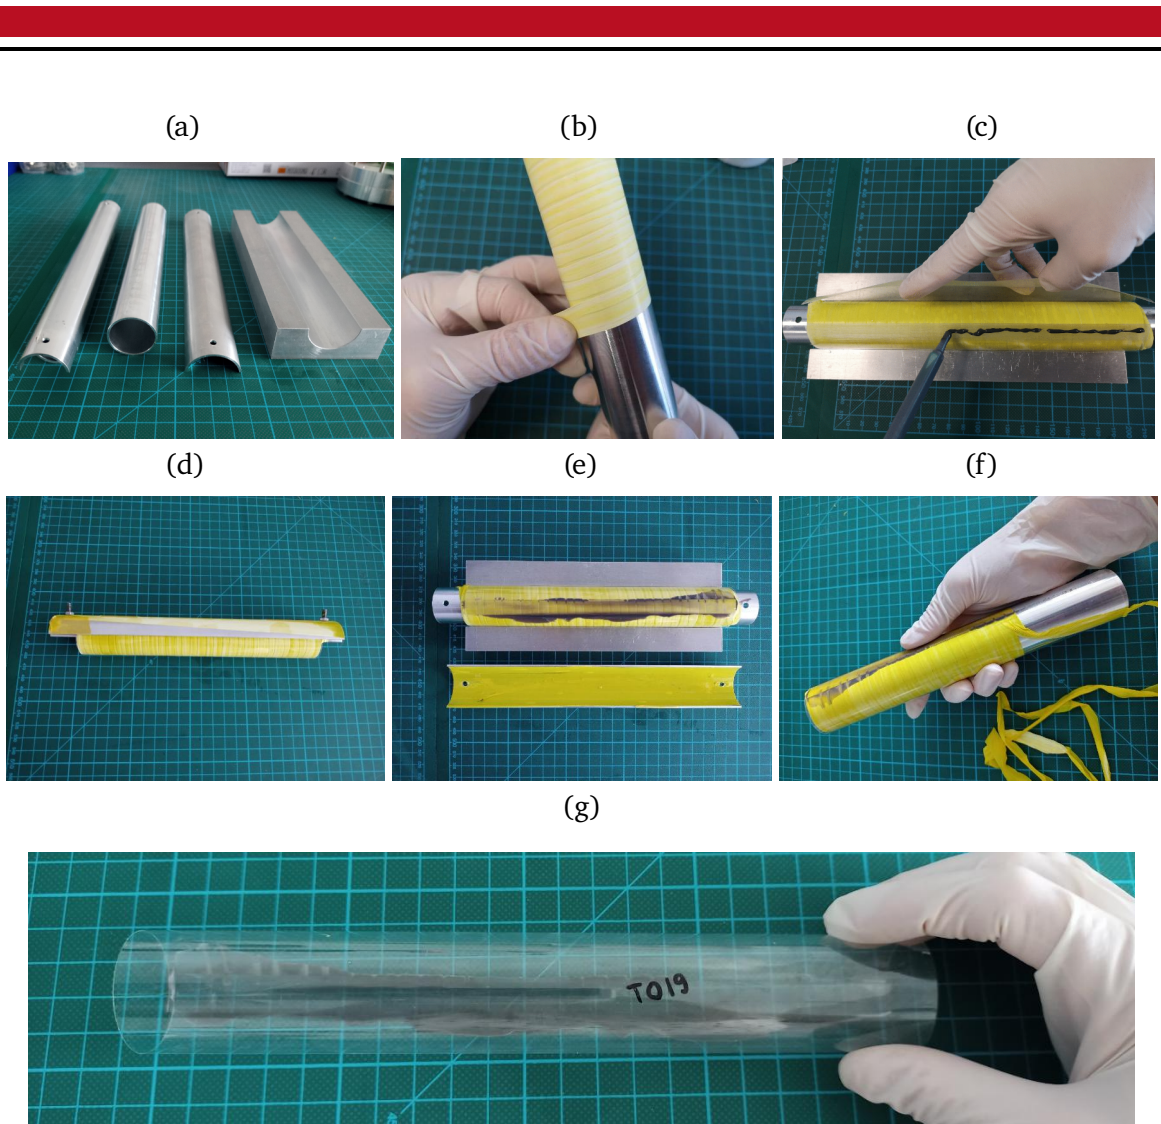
Photos with the tools (a), the preparation of the tools (b) and the gluing procedure (c) of the tube part of the target cell. After curing (d) and unmolding (e-f), the glued tube is shown in photo (g).
